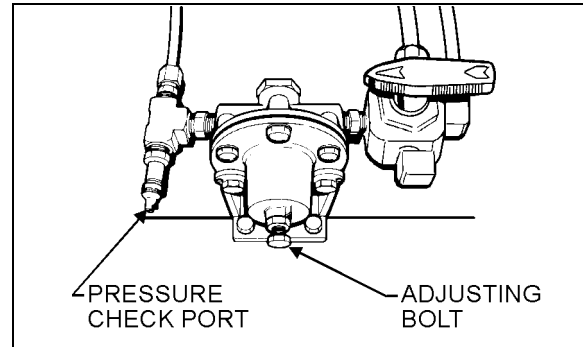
AIR PRESSURE REGULATING VALVE 12036
